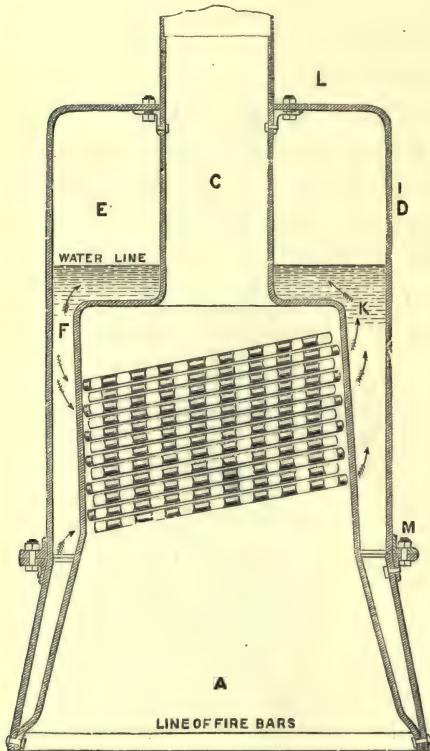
Sectional elevation of Shand and Mason's inclined water tube boiler for fire-engines.
